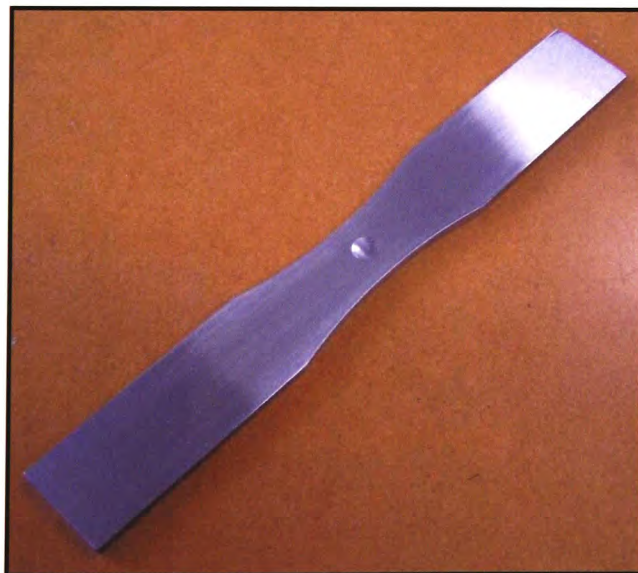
A specimen subjected to a single impact using the 10mm radius impactor hammer head
